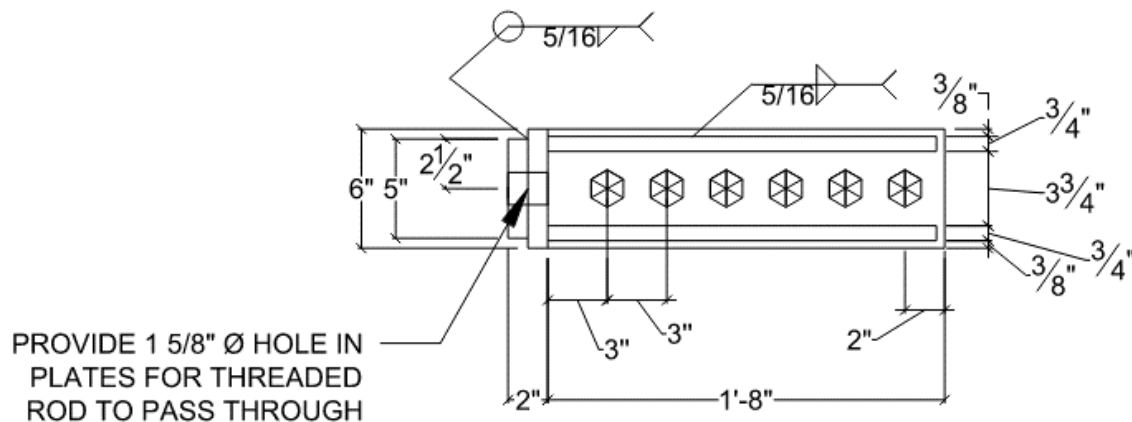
Close-Up Plan View of Steel Bracket Assembly.
